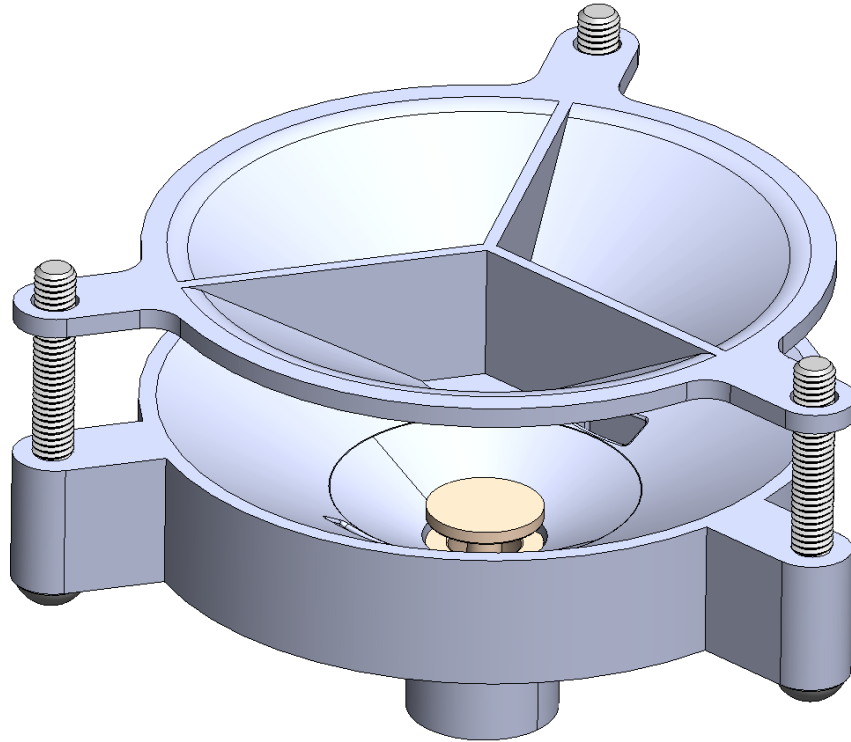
CAD model of suction module molds. Not shown: spacers to offset top and bottom molds.
